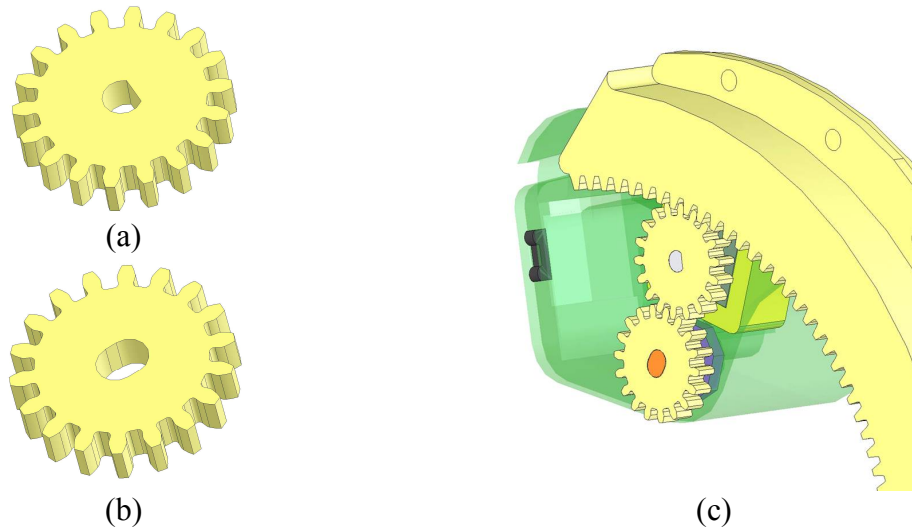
SDM gears for the motor (a), rotary pot (b), and the final gearing assembly (c).
